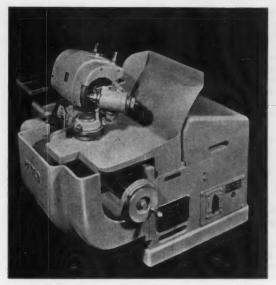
Precision tool-sharpening machine to be displayed Fig. 4. Cam-actuated Bore-Matic primarily intended for the for the first time by Heald Machine Co.
